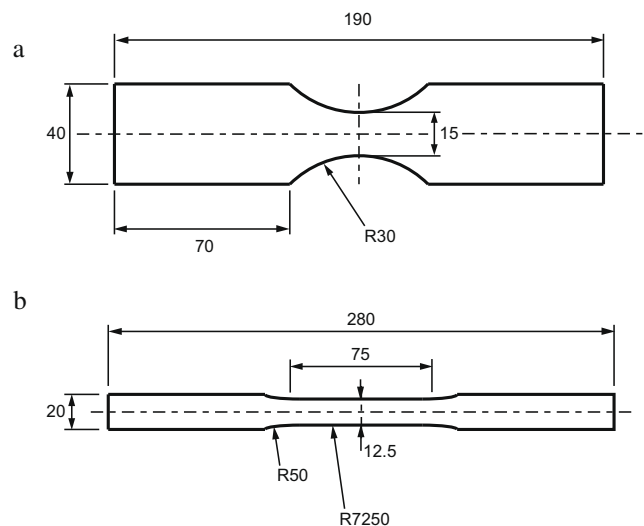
Specimen shapes (a) with shallow notches and (b) conventional straight specimen.
